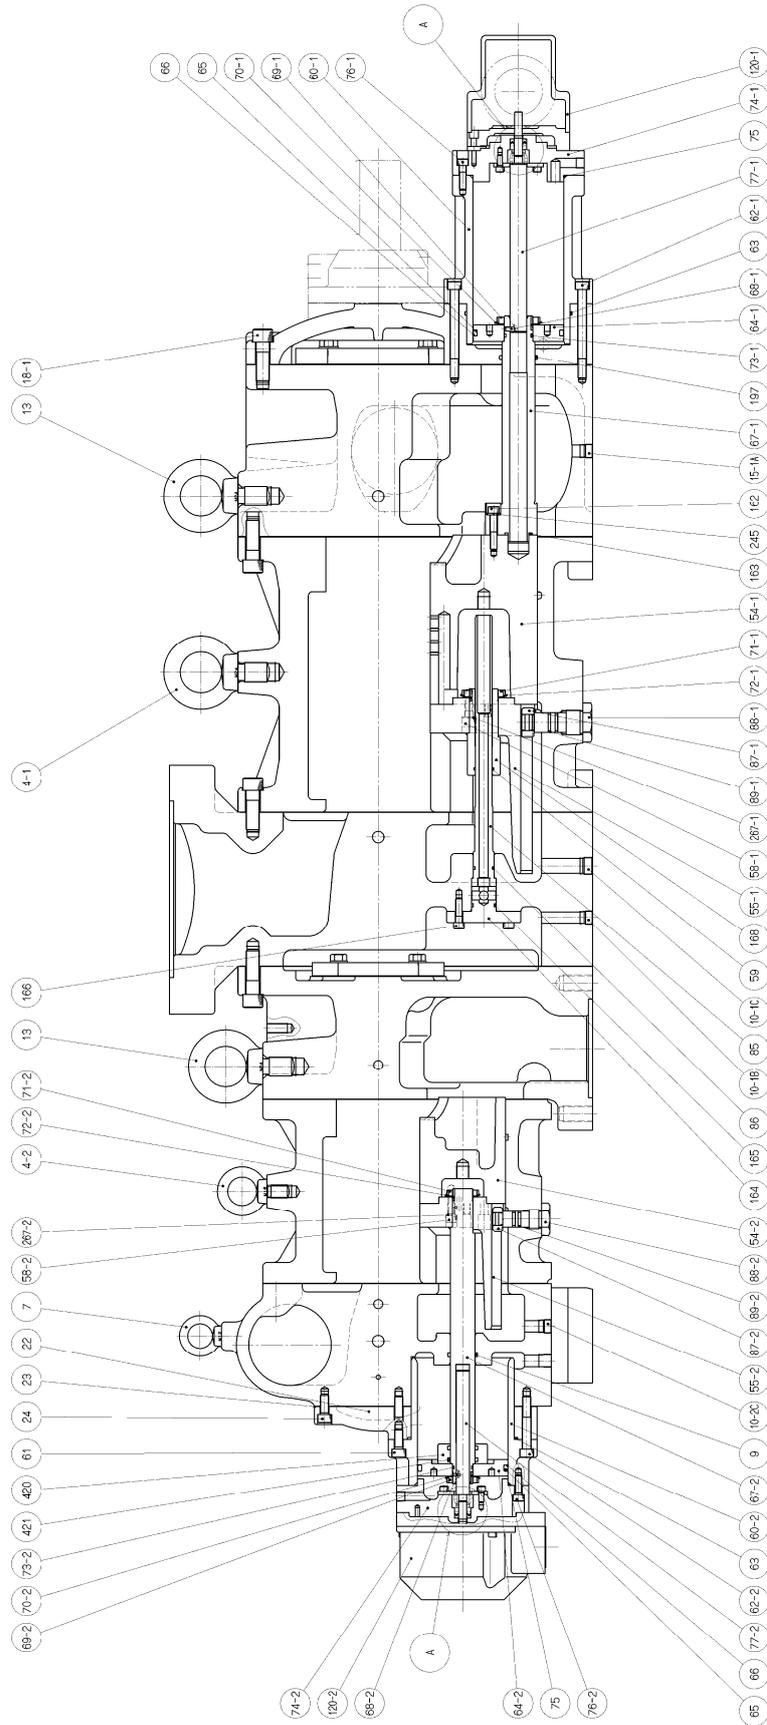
2016LMC Assembly Sectional View (Vertical)
